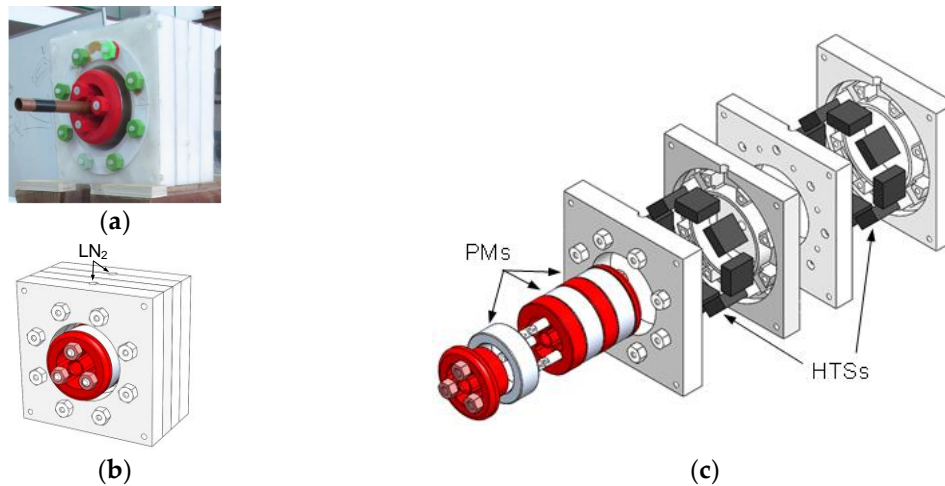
A photo (a), the assembly 3D design (b), and the extruded 3D design (c) of the studied HTS ZFC passive magnetic bearing experimental prototype.
